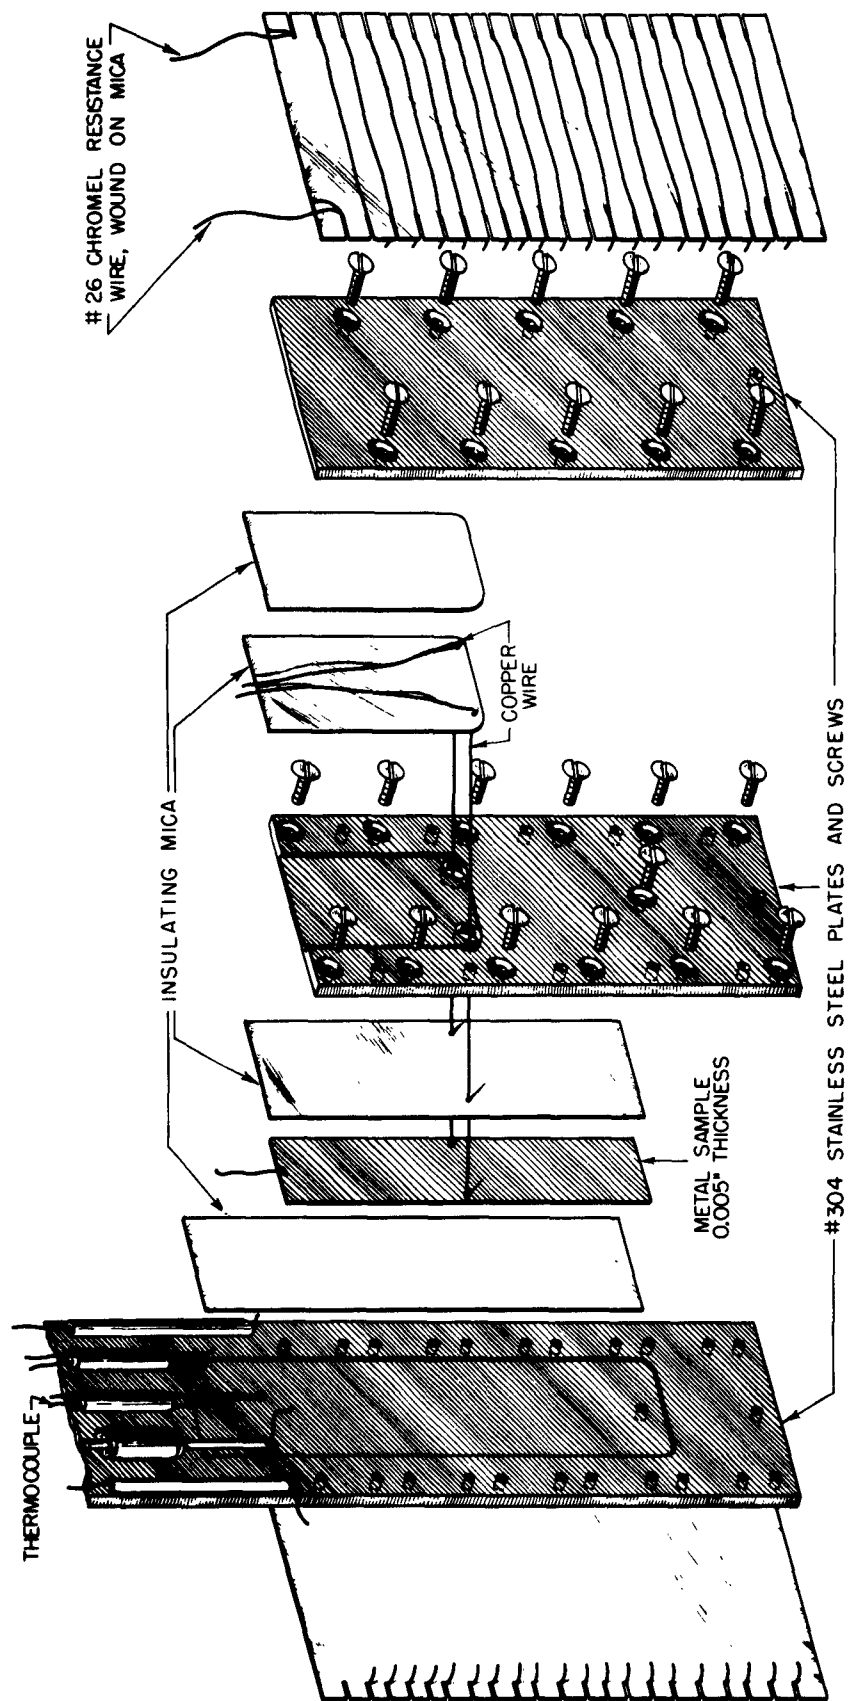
AN EXPLODED VIEW OF THE HIGH TEMPERATURE SAMPLE HOLDER FOR METAL SAMPLES
